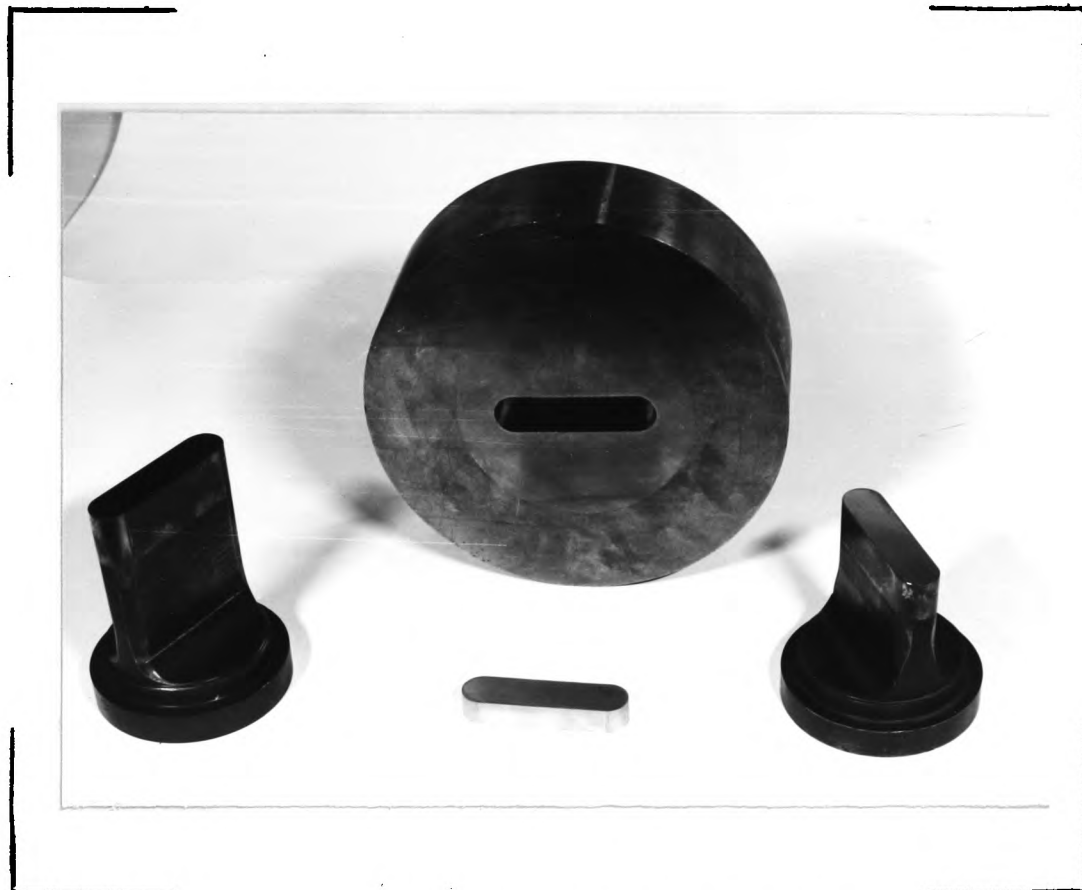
COMPONENT PARTS OF SINGLE-ENDED COMPACTION TOOL TO
